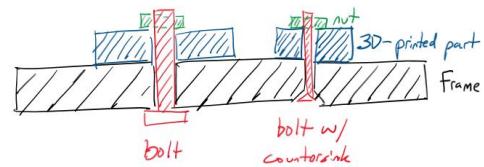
Concept sketch depicting generalized method for attaching 3D-printed parts (blue) to the frame (black) by passing a bolt (red) through the frame and part and securing the bolt with a nut (green) at the top. The bolt may or may not be countersunk depending on whether the frame rests on the printer base or hangs over the base's edge at the point of attachment.
